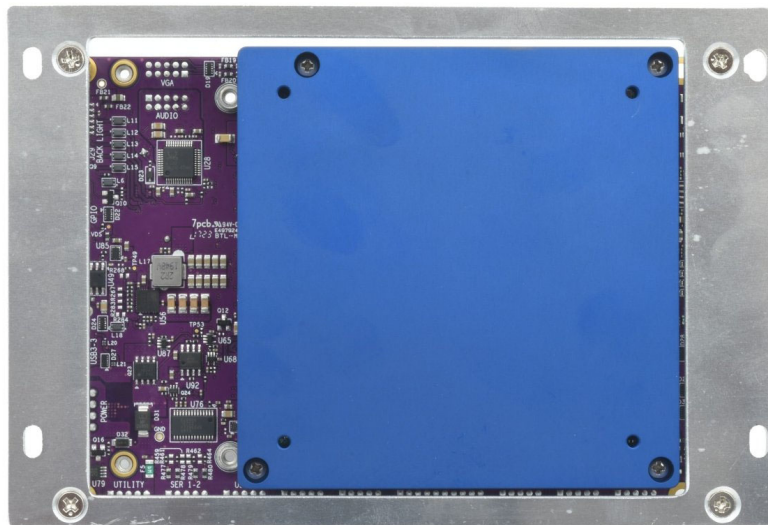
Bottom view showing Compact size COM heat spreader nested in mounting plate.
